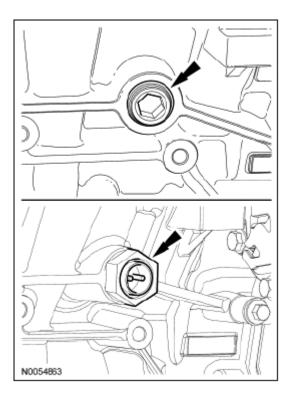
Locating Pin-Type Retainer Courtesy of FORD MOTOR CO.
